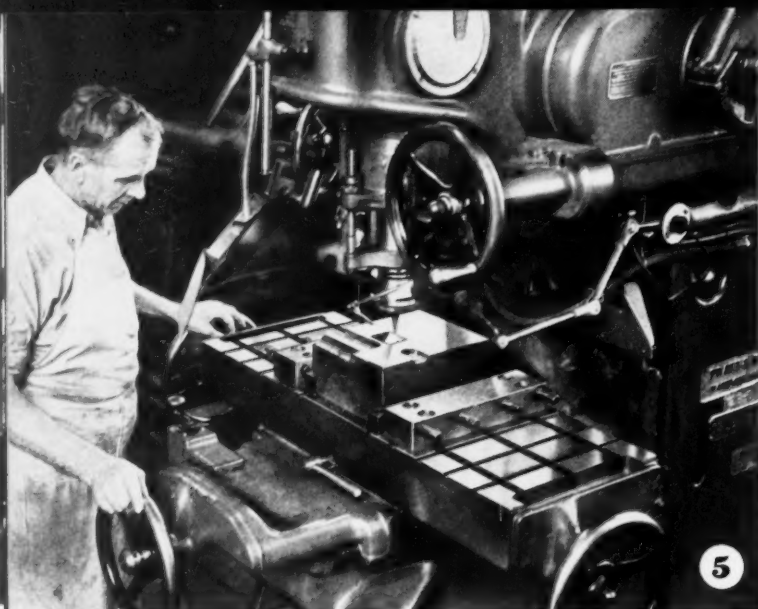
Universal Die-sinker Used for Cutting Irregular Contours in Forging Dies and Similar Work
